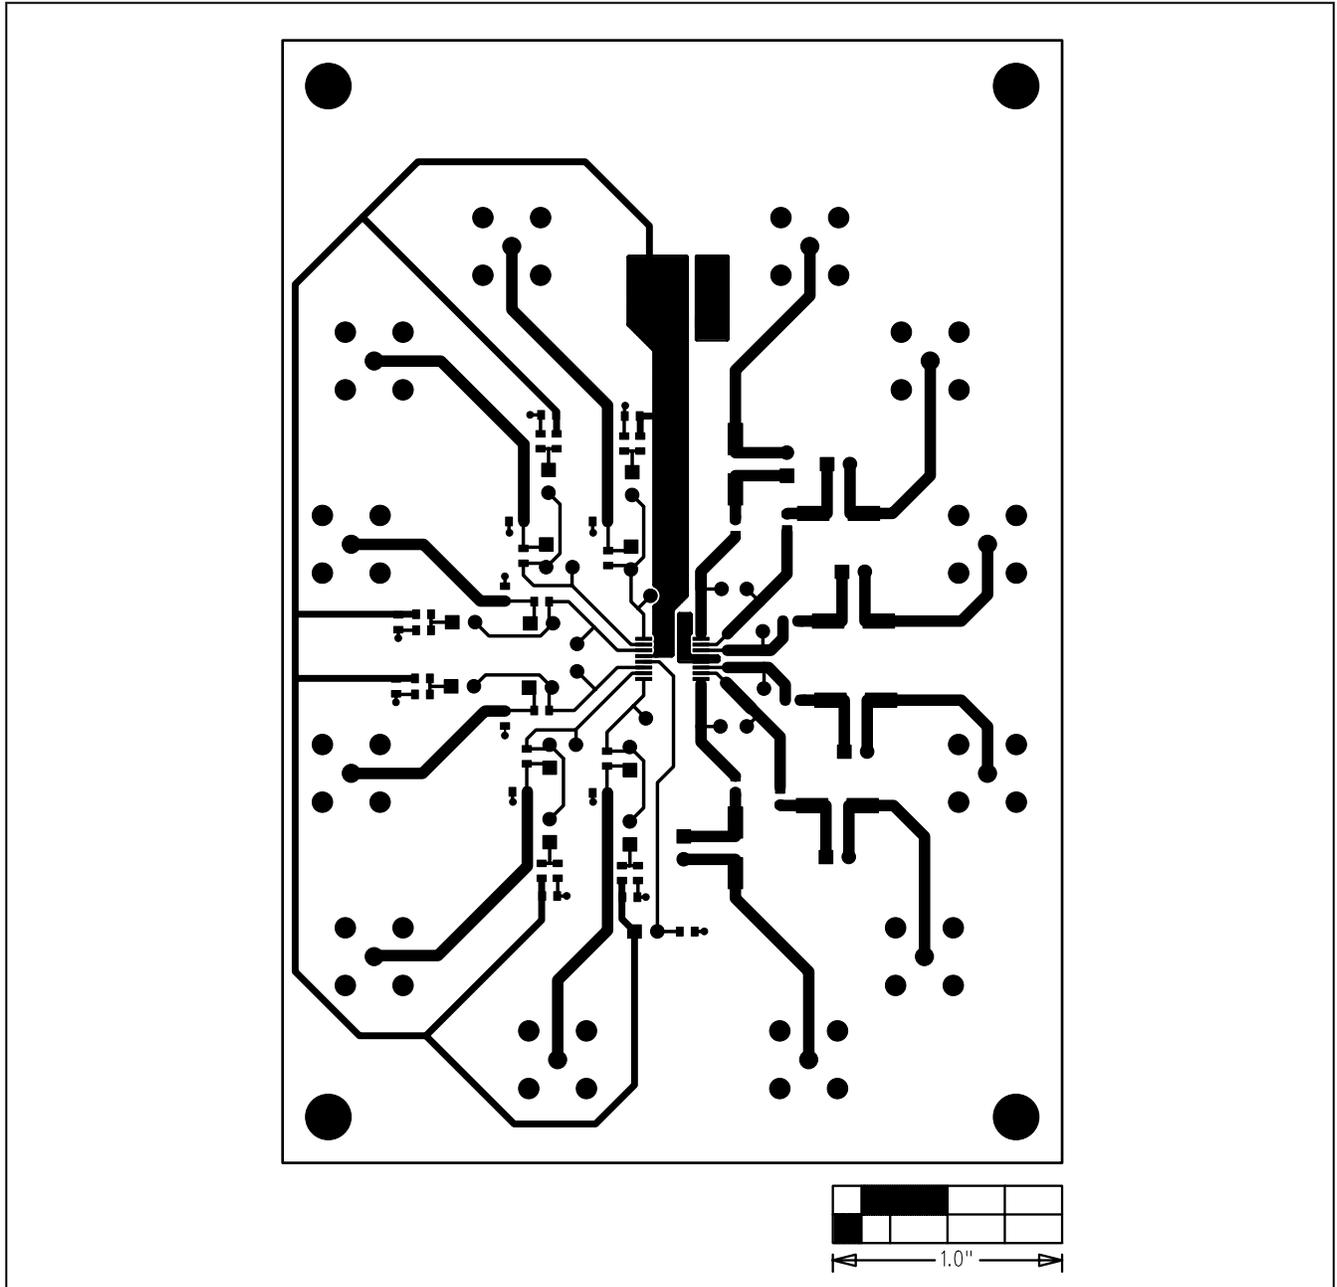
MAX11506 EV Kit PCB Layout—Component Side
